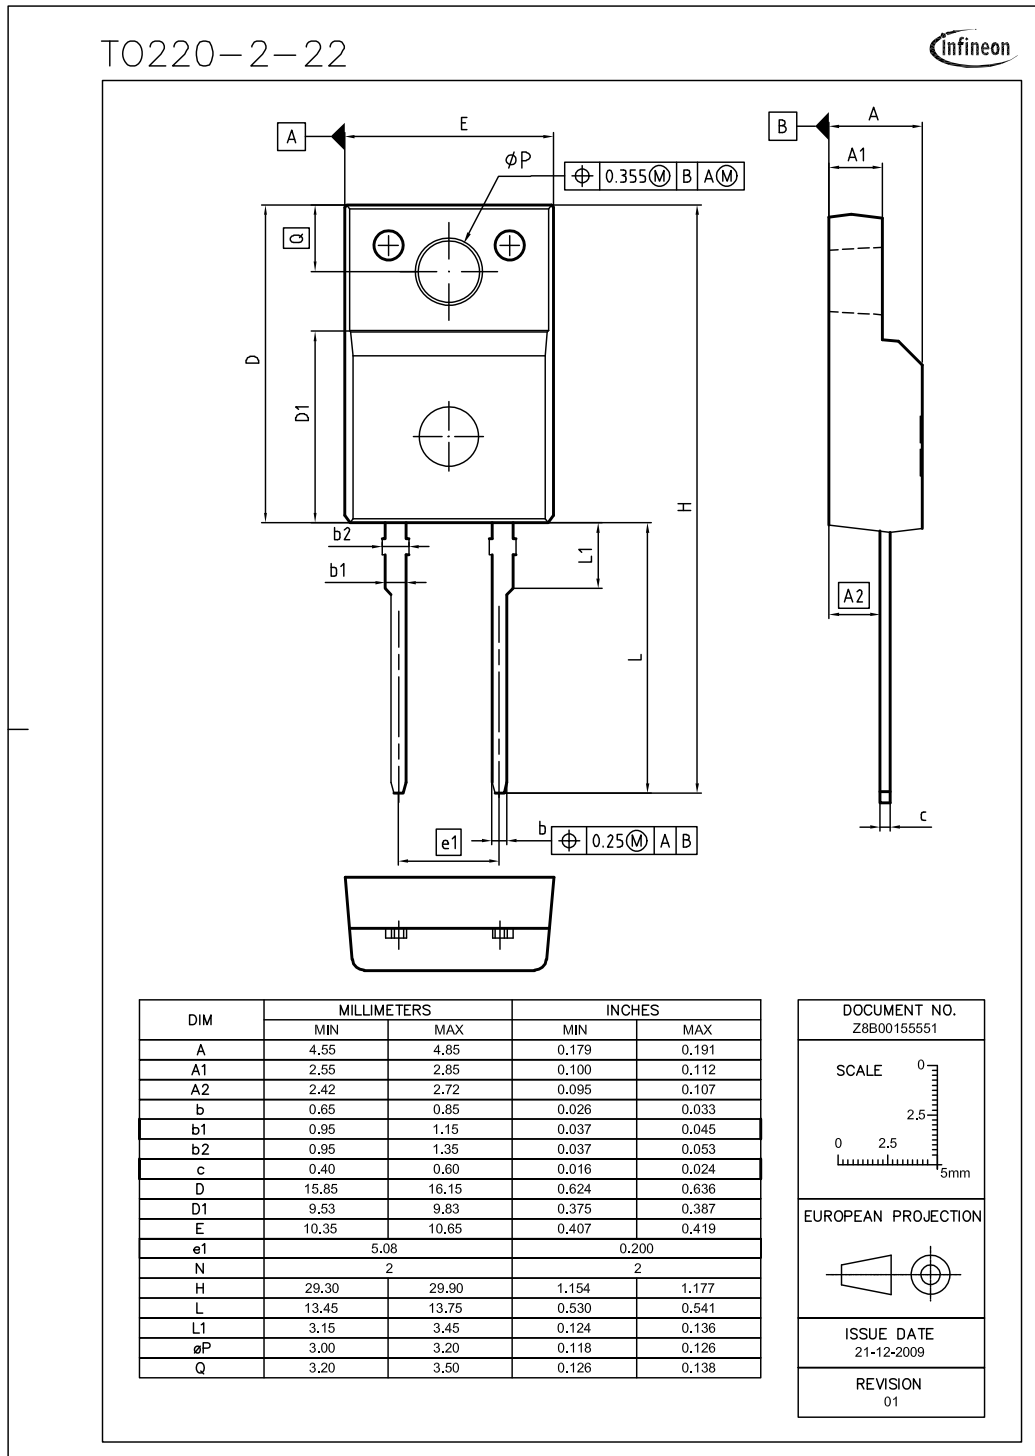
Outlines TO-220 FullPAK, dimensions in mm/inches
